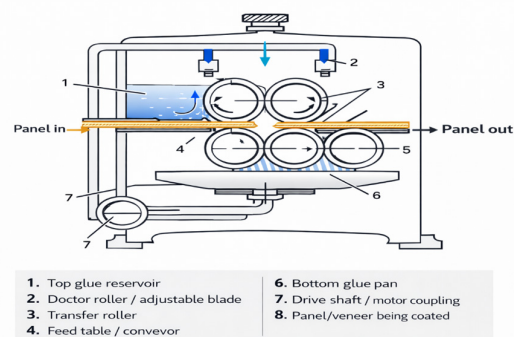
Cross-sectional schematic of the four-roller glue spreader machine used to apply adhesive to both faces of core veneers or panels in bamboo plywood production (reproduces Figure 4 of the main text).
